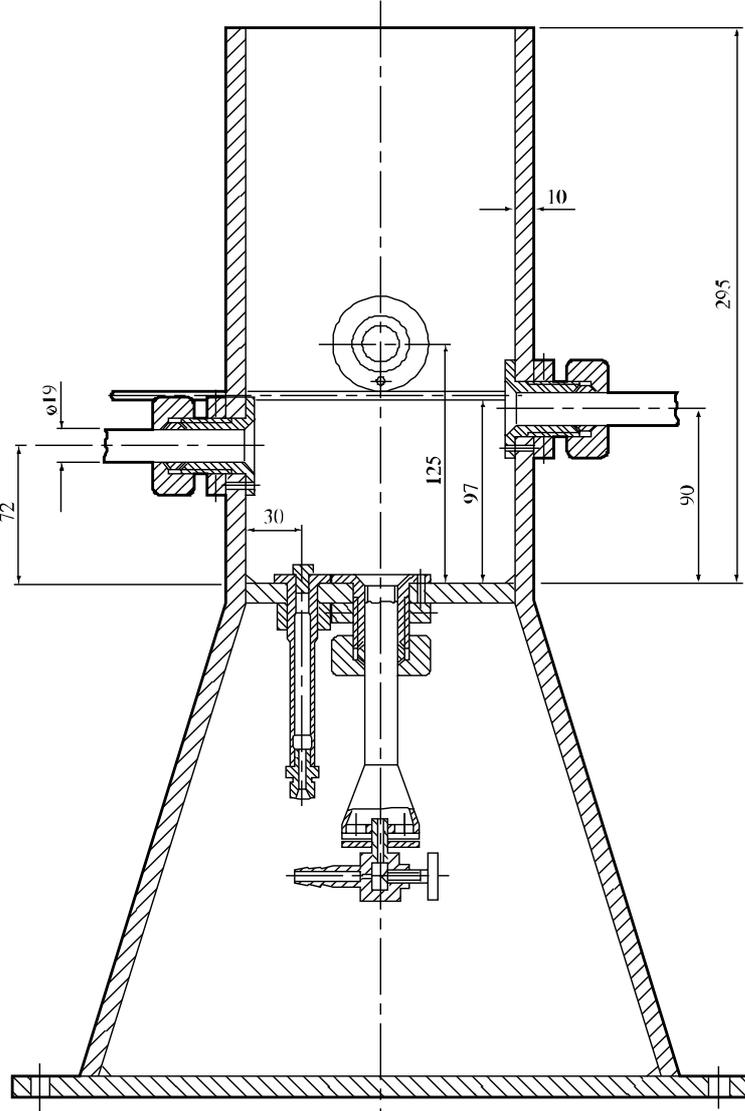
HEATING AND PROTECTIVE DEVICE
